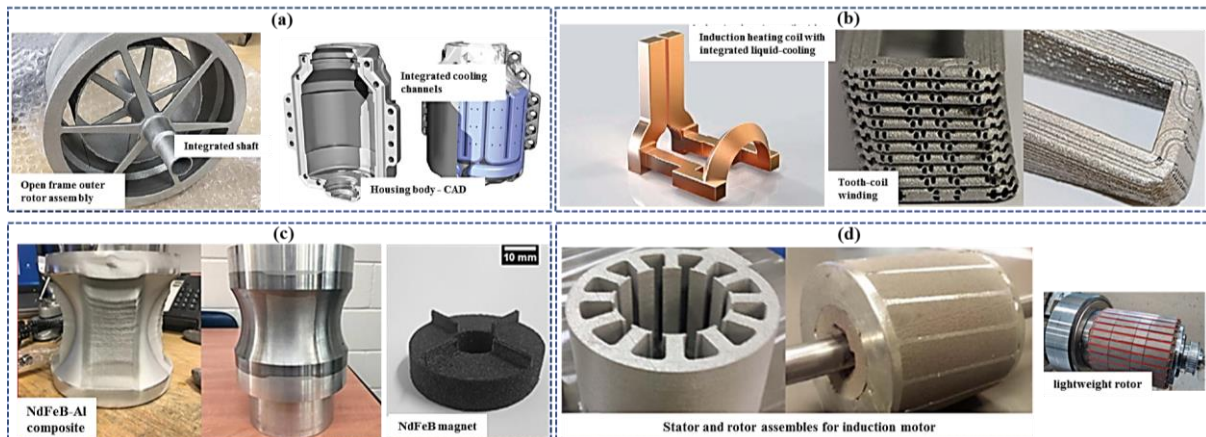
Examples of AM parts for electrical machine (a) mechanical and thermal management assemblies [112, 113]; (b) coils/windings: [117, 118]; (c) permanent magnets (PM) [119, 120], (d) stator/rotor packs: [122, 124]
